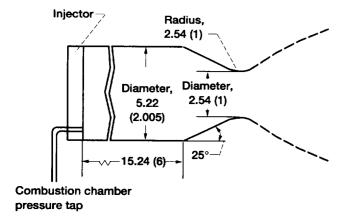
Combustion chamber shape. For nozzle contour, see figure 6. Dimensions are in centimeters (in.).
